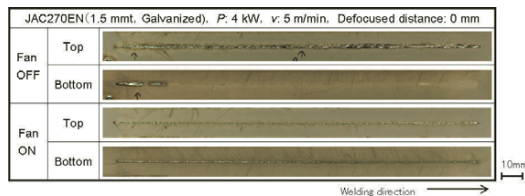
Top and bottom surface appearances of fiber laser weld beads in zinc coated steel sheets at 4kW and 5 m/min with/without fan blowing (Initial bead spot size: about 0.4 mm).
